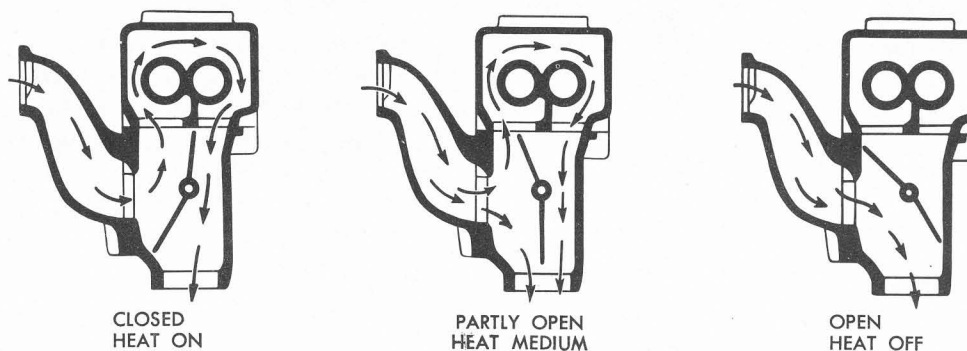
Exhaust Manifold Valve Operation—Sectional View
